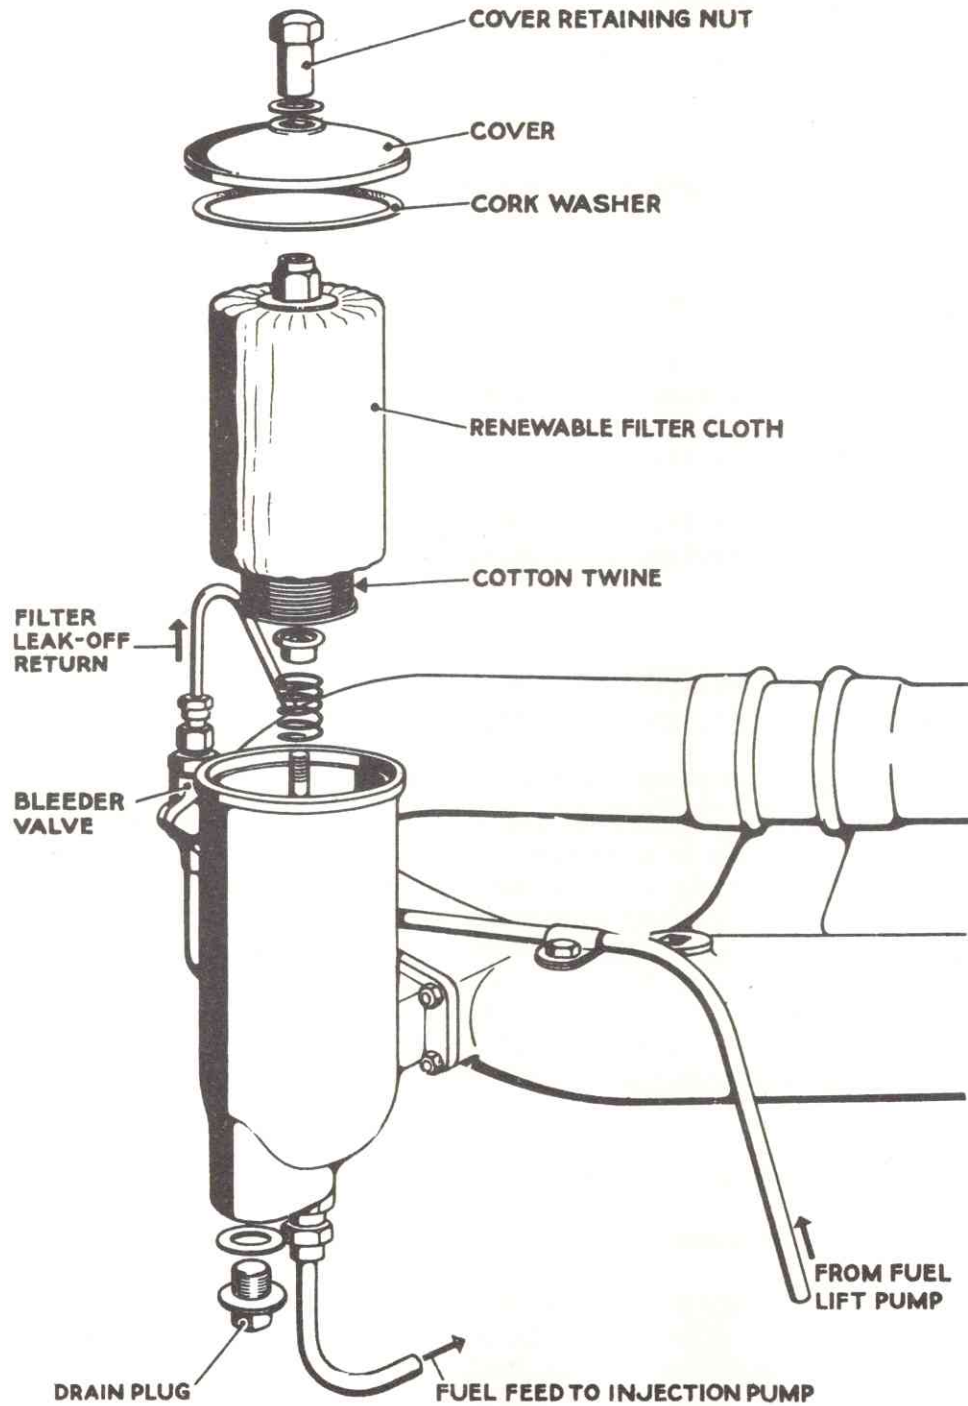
Fuel Filter - Leyland Type (single chamber)
